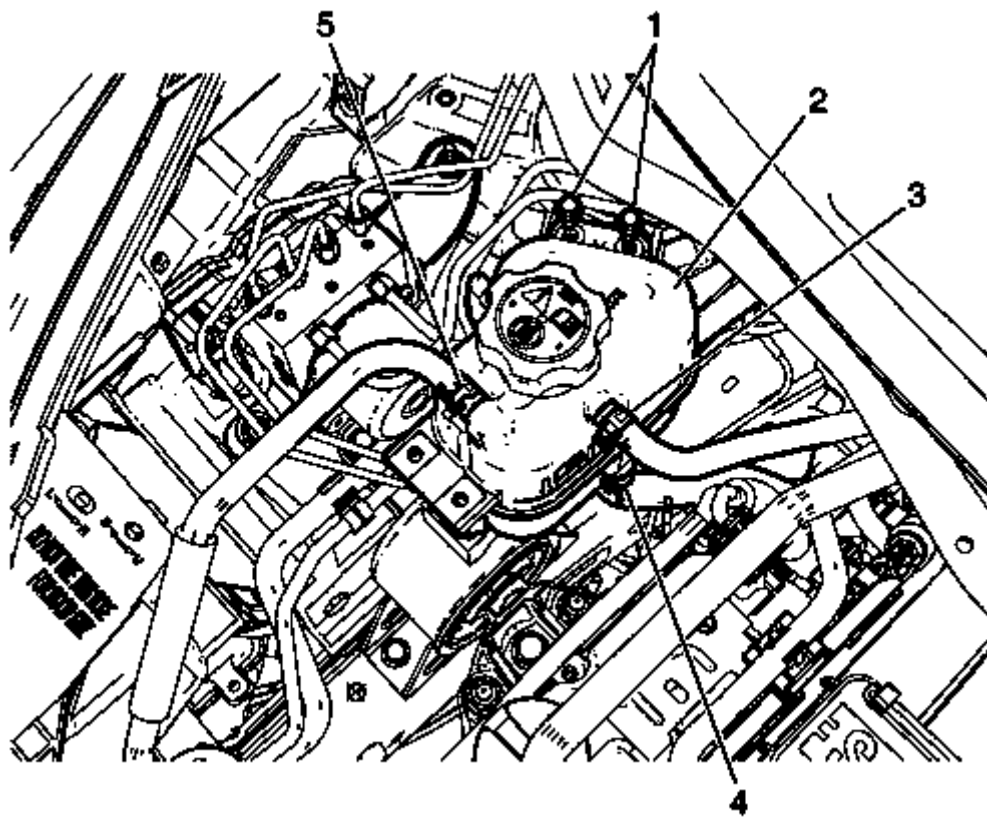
Radiator Surge Tank Outlet Hose Clamp
